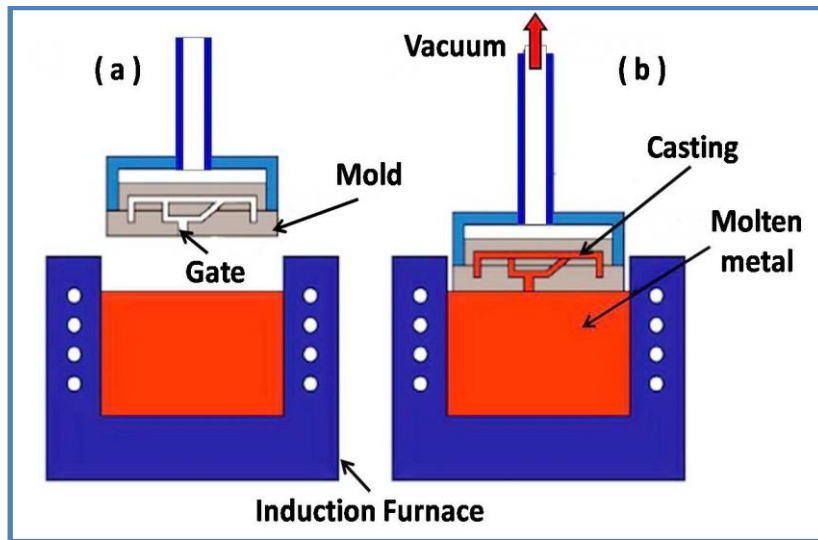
Vacuum Permanent mold casting (a) before the process (b) Casting performed.
